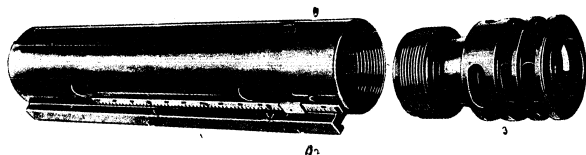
MANTLE WITH MUZZLE BRAKE - General view
